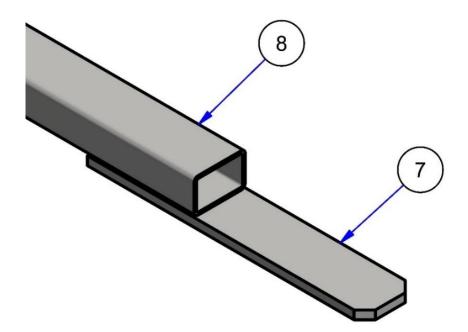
(Assembly 2: Standard Strengthener Plate and Wheel Rest Box)
